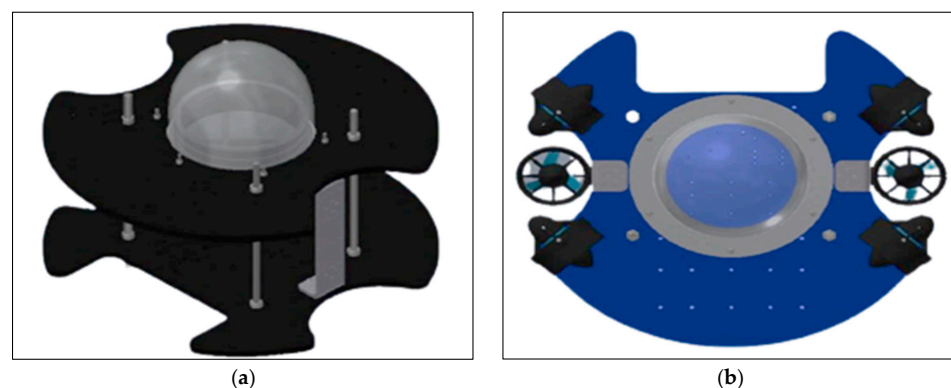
Proposed ROV prototype (a) Isometric view, (b) Top view.
